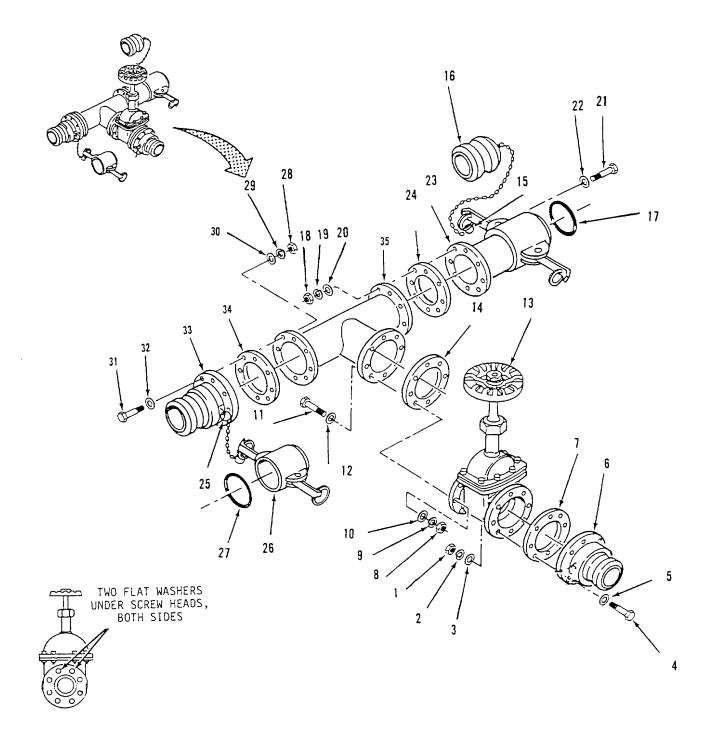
Tee and Gate Valve Assembly (9133-Y1) Disassembly.
